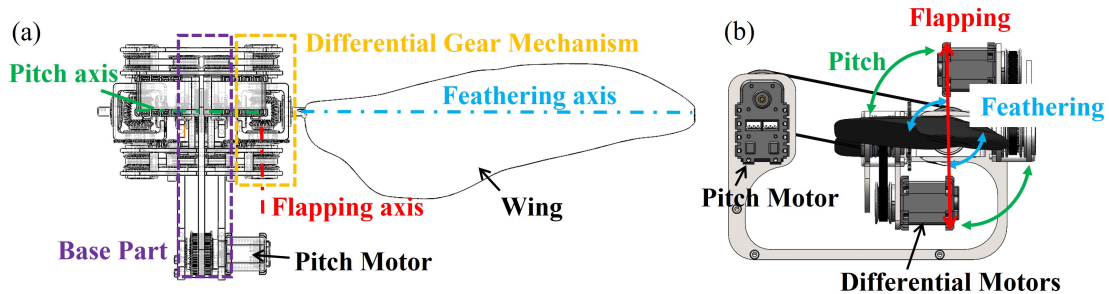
(a) Schematic drawing of the driving mechanism (top view); (b) Side view of the driving mechanism.
